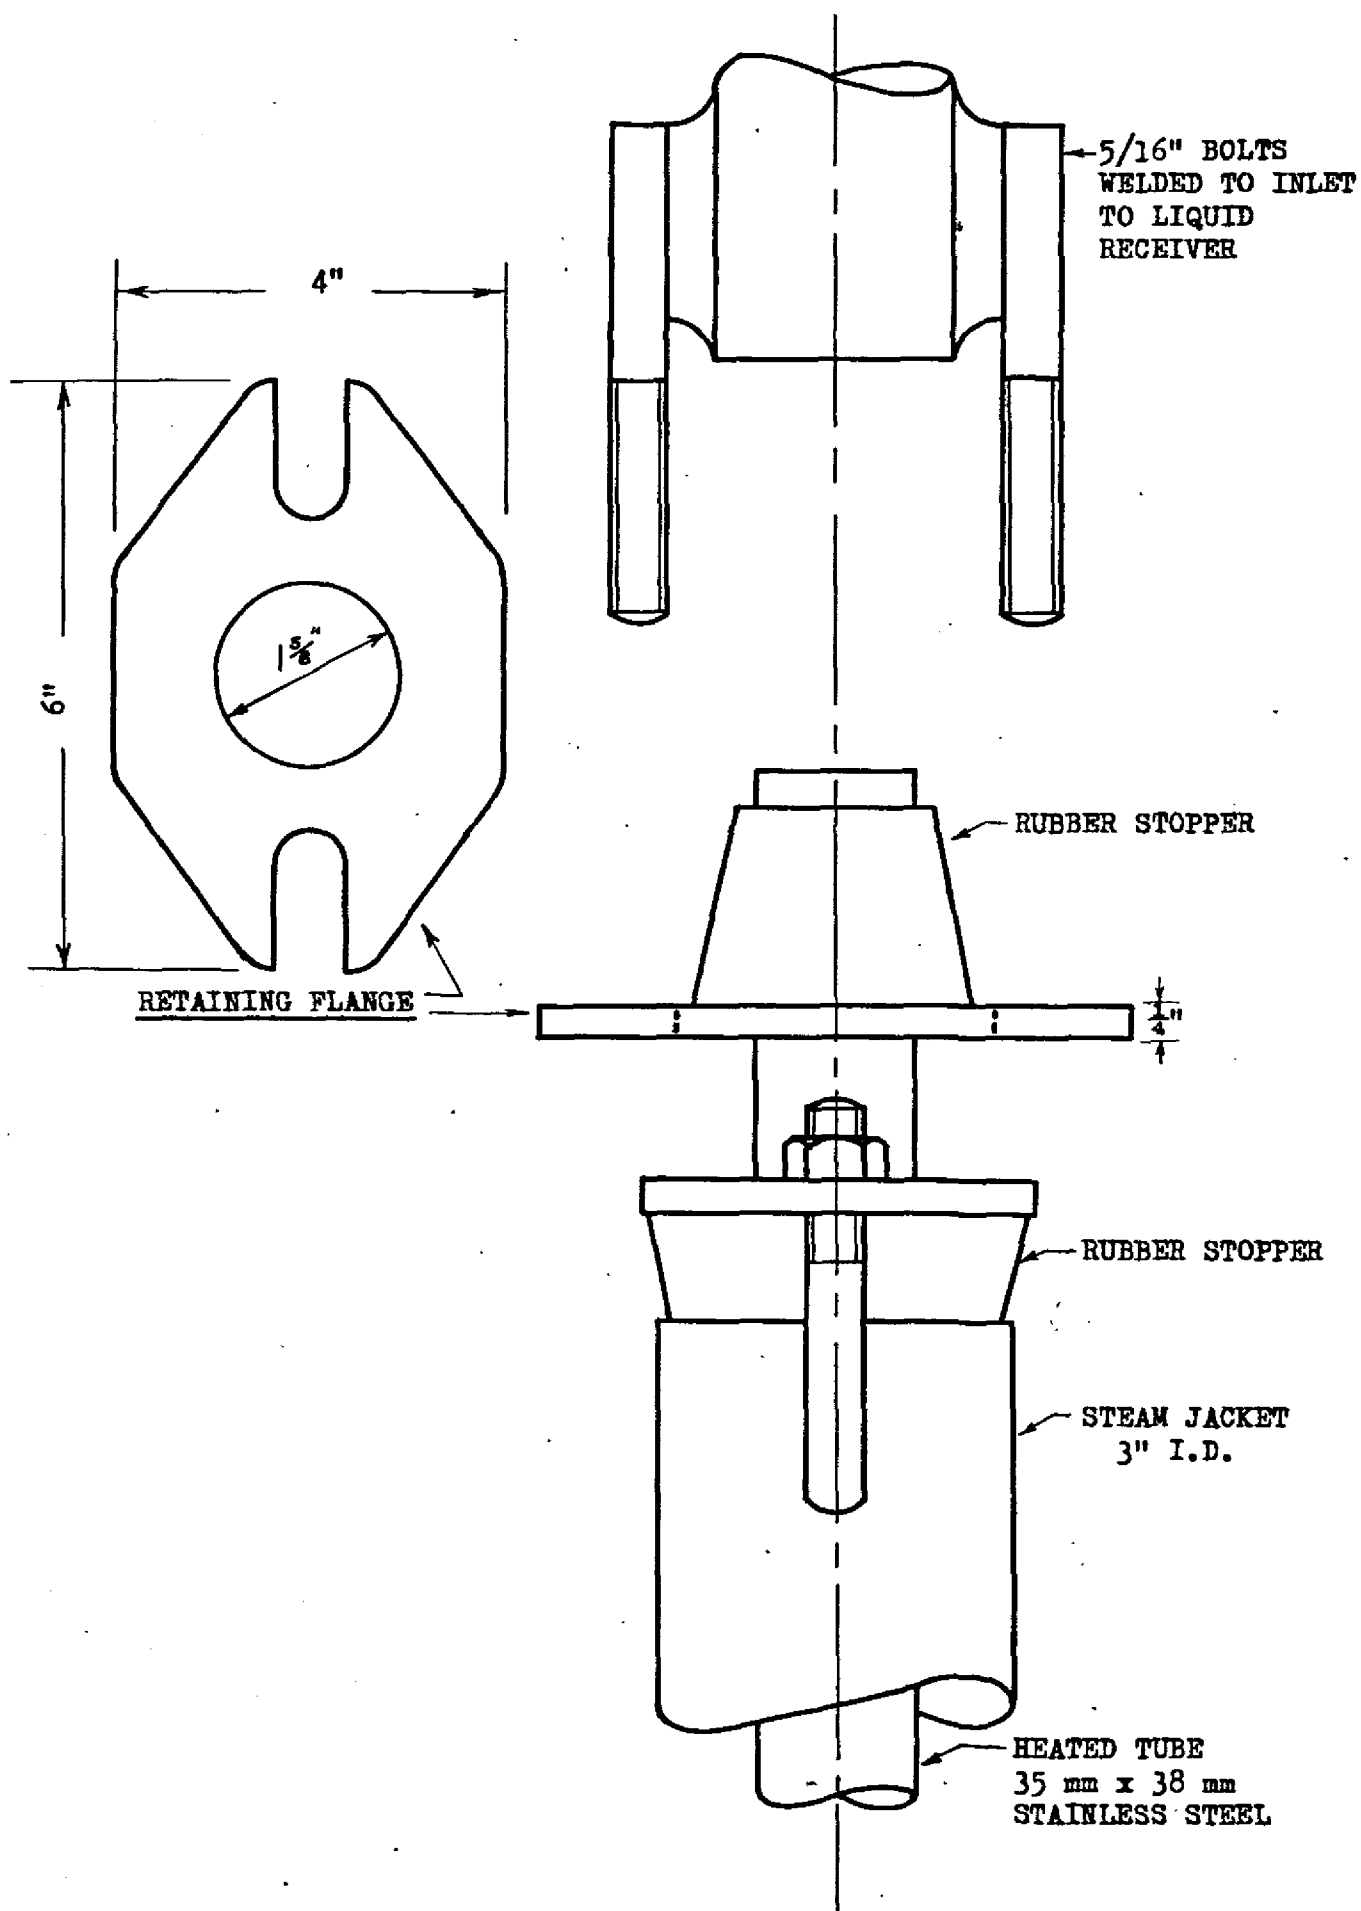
ORIGINAL TUBE AND JACKET ASSEMBLY
